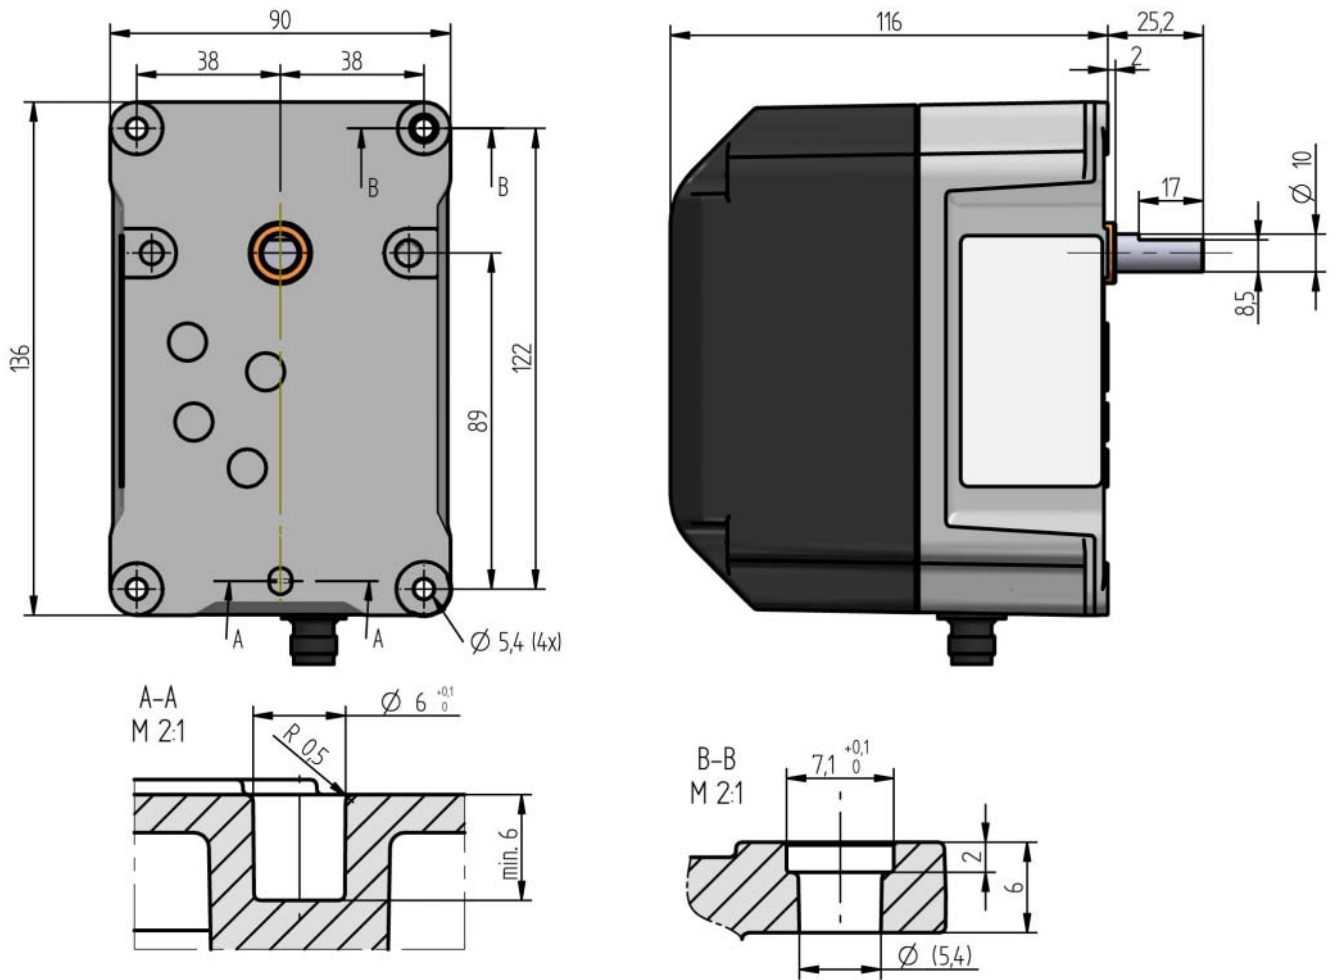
Dimensional drawing of servo motor type 662R5001-0 and 662R5003-0 without cable but with plug
